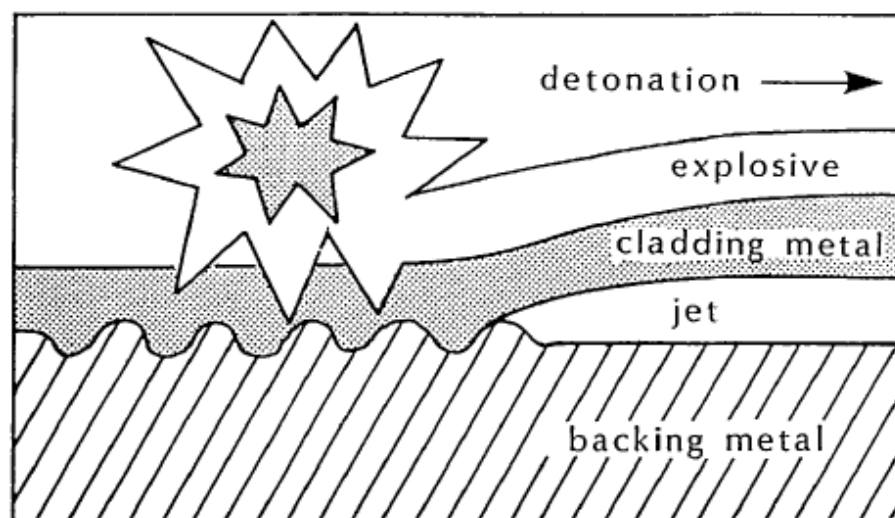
Explosion-bonding weld processes [5].
